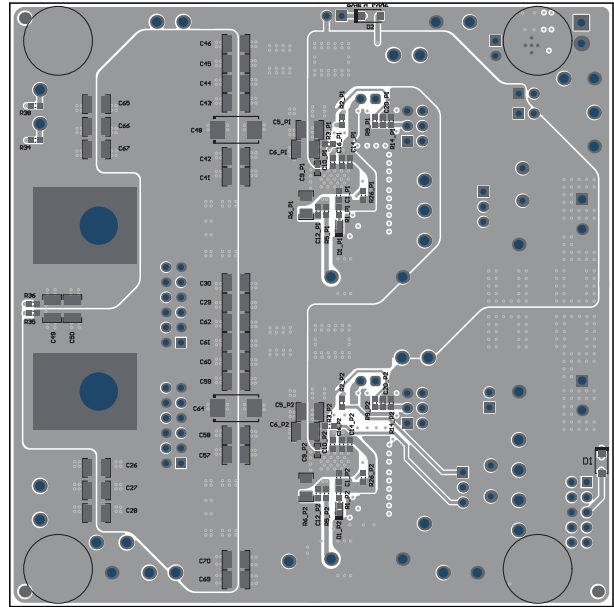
TPS546D24SEVM-2PH Bottom Side Component View (Bottom View)
